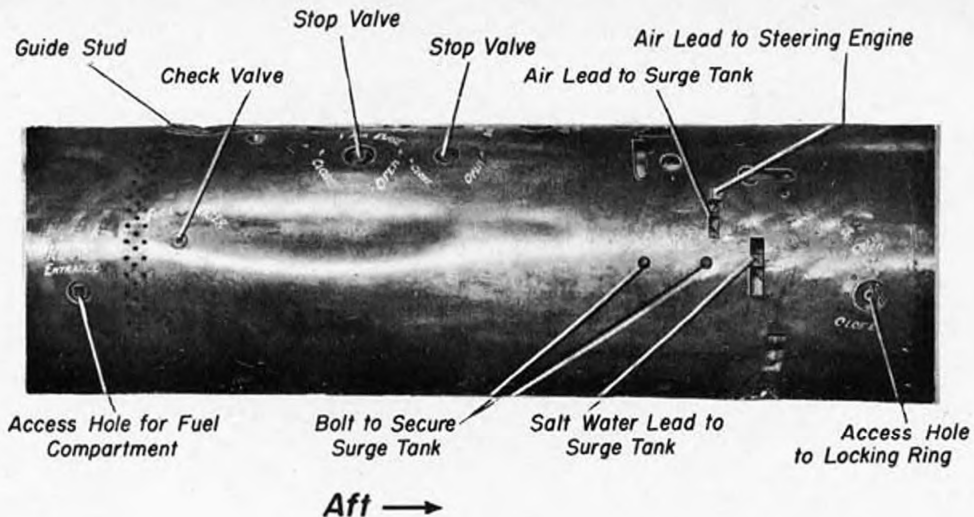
Torpedo Type 97, Flask Section, Port View
